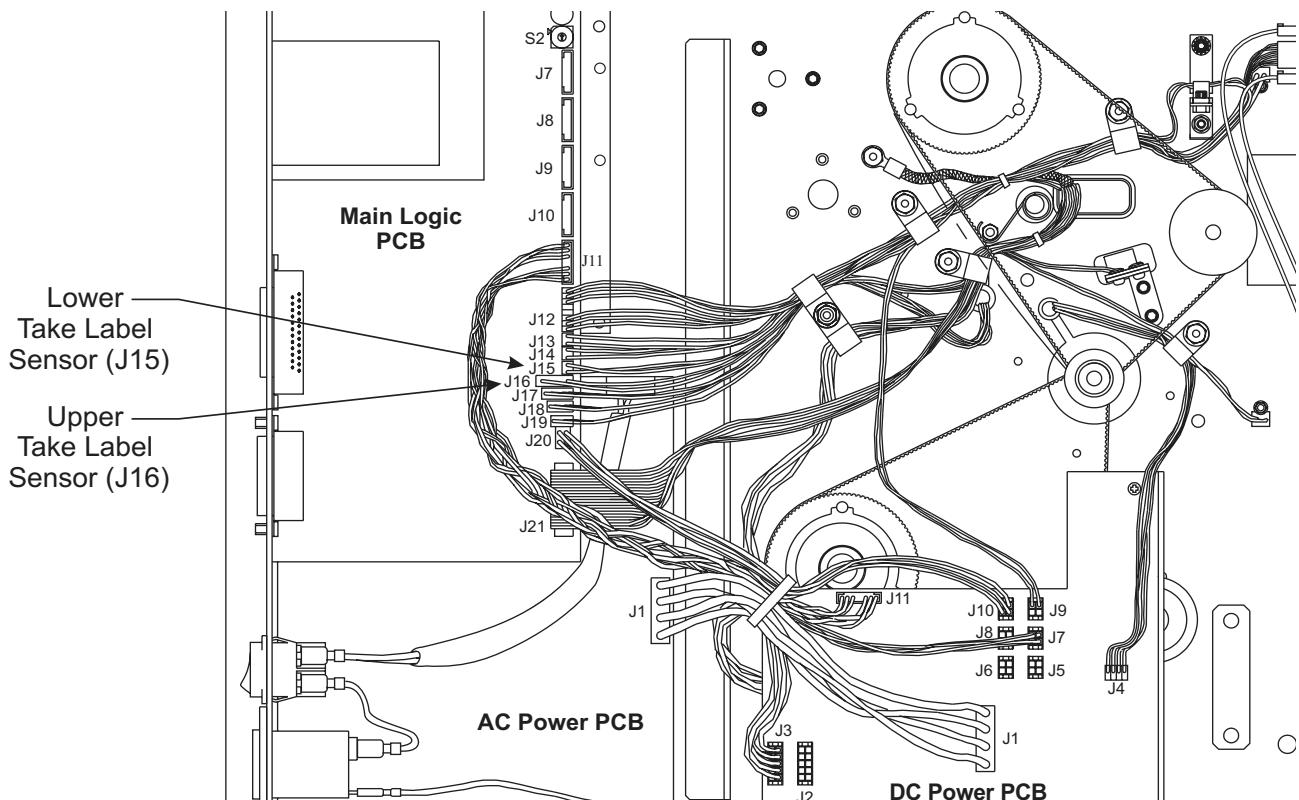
Sensor Connector Location (Printer Configurations 10500-0XXX-XXXX and 10500-1XXX-XXXX)
